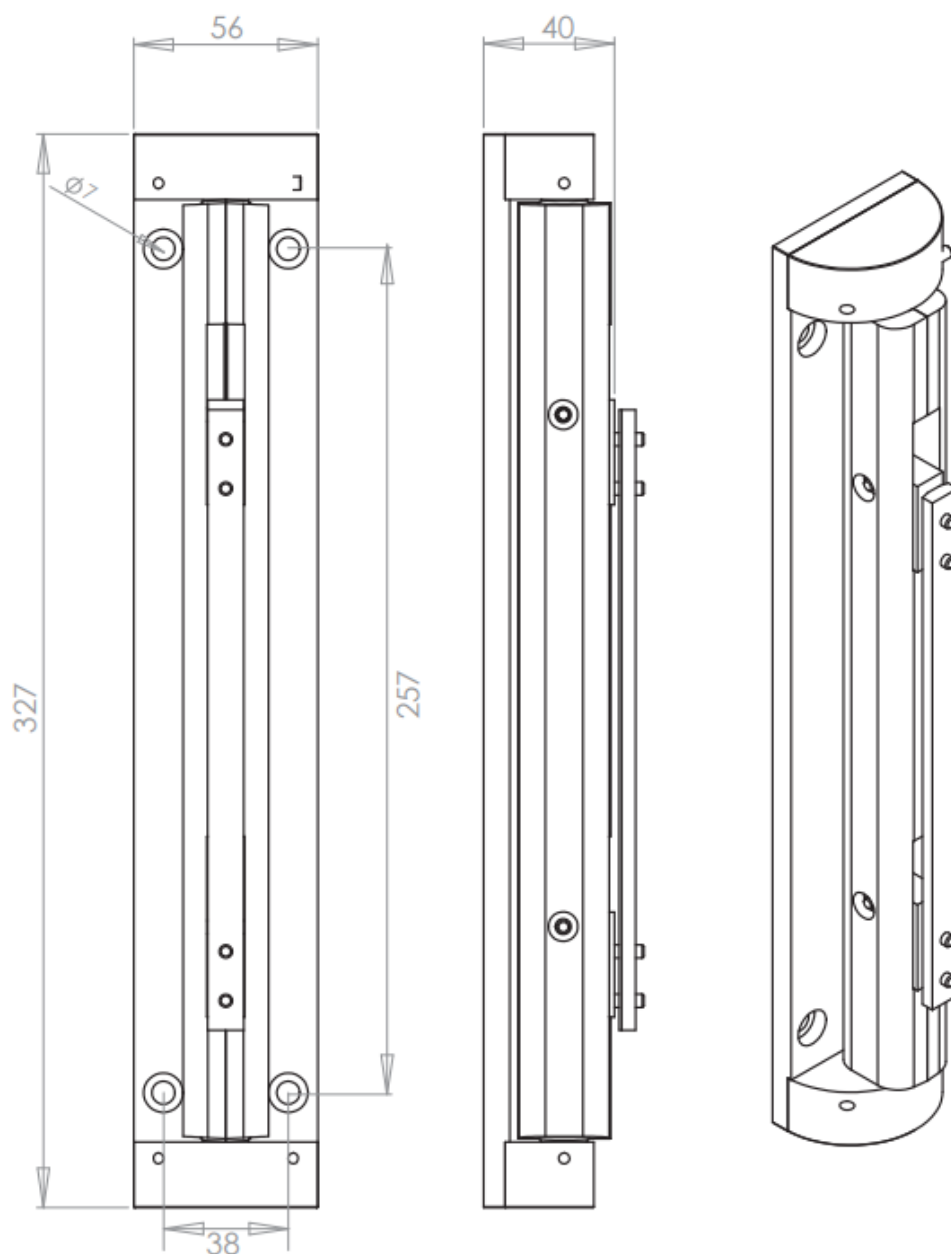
Fixing brackets for wall mounting of Ray-On+ columns
